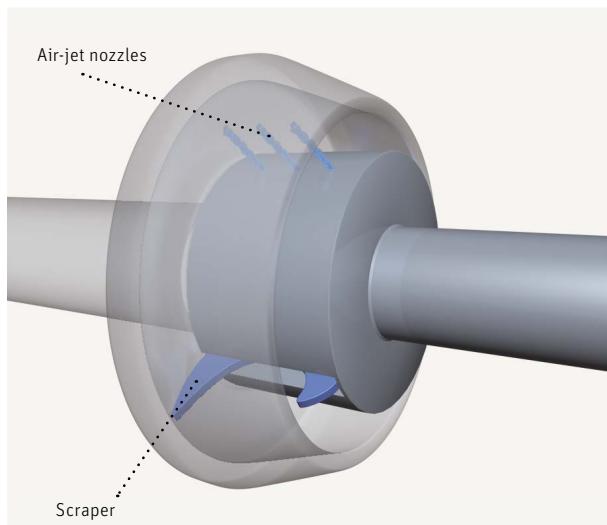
Rotor cleaning module with Air-jet nozzles and scrapers
